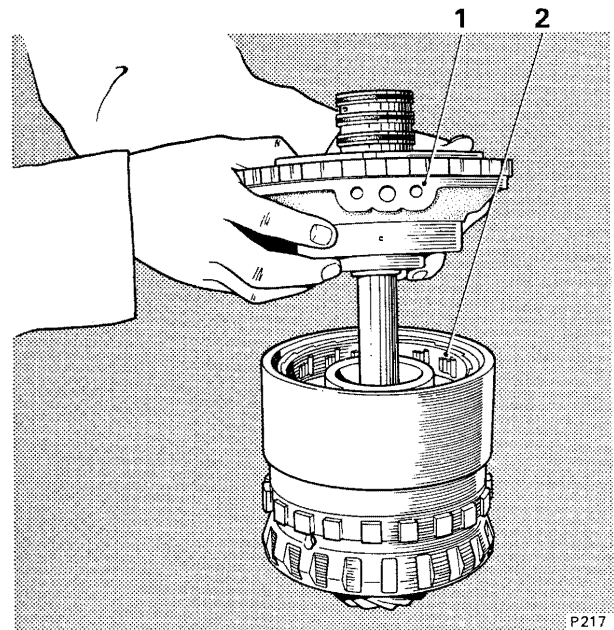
FITTING THE CENTRE SUPPORT INTO THE REACTION CARRIER (ROLLER CLUTCH)
